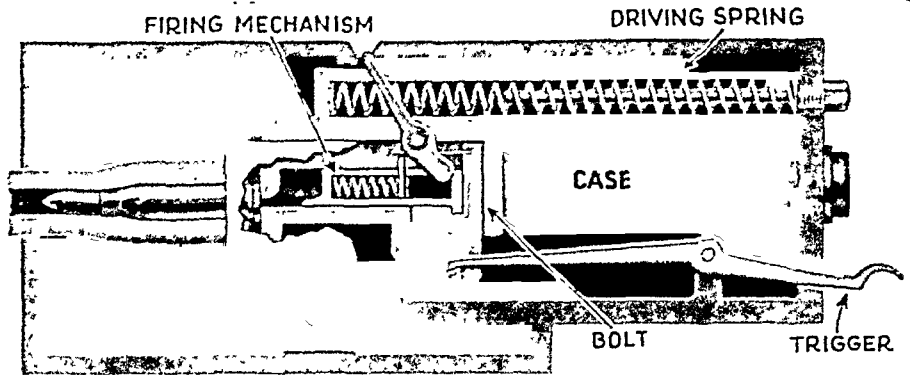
The Principal Working Parts of the Browning Machine Gun
